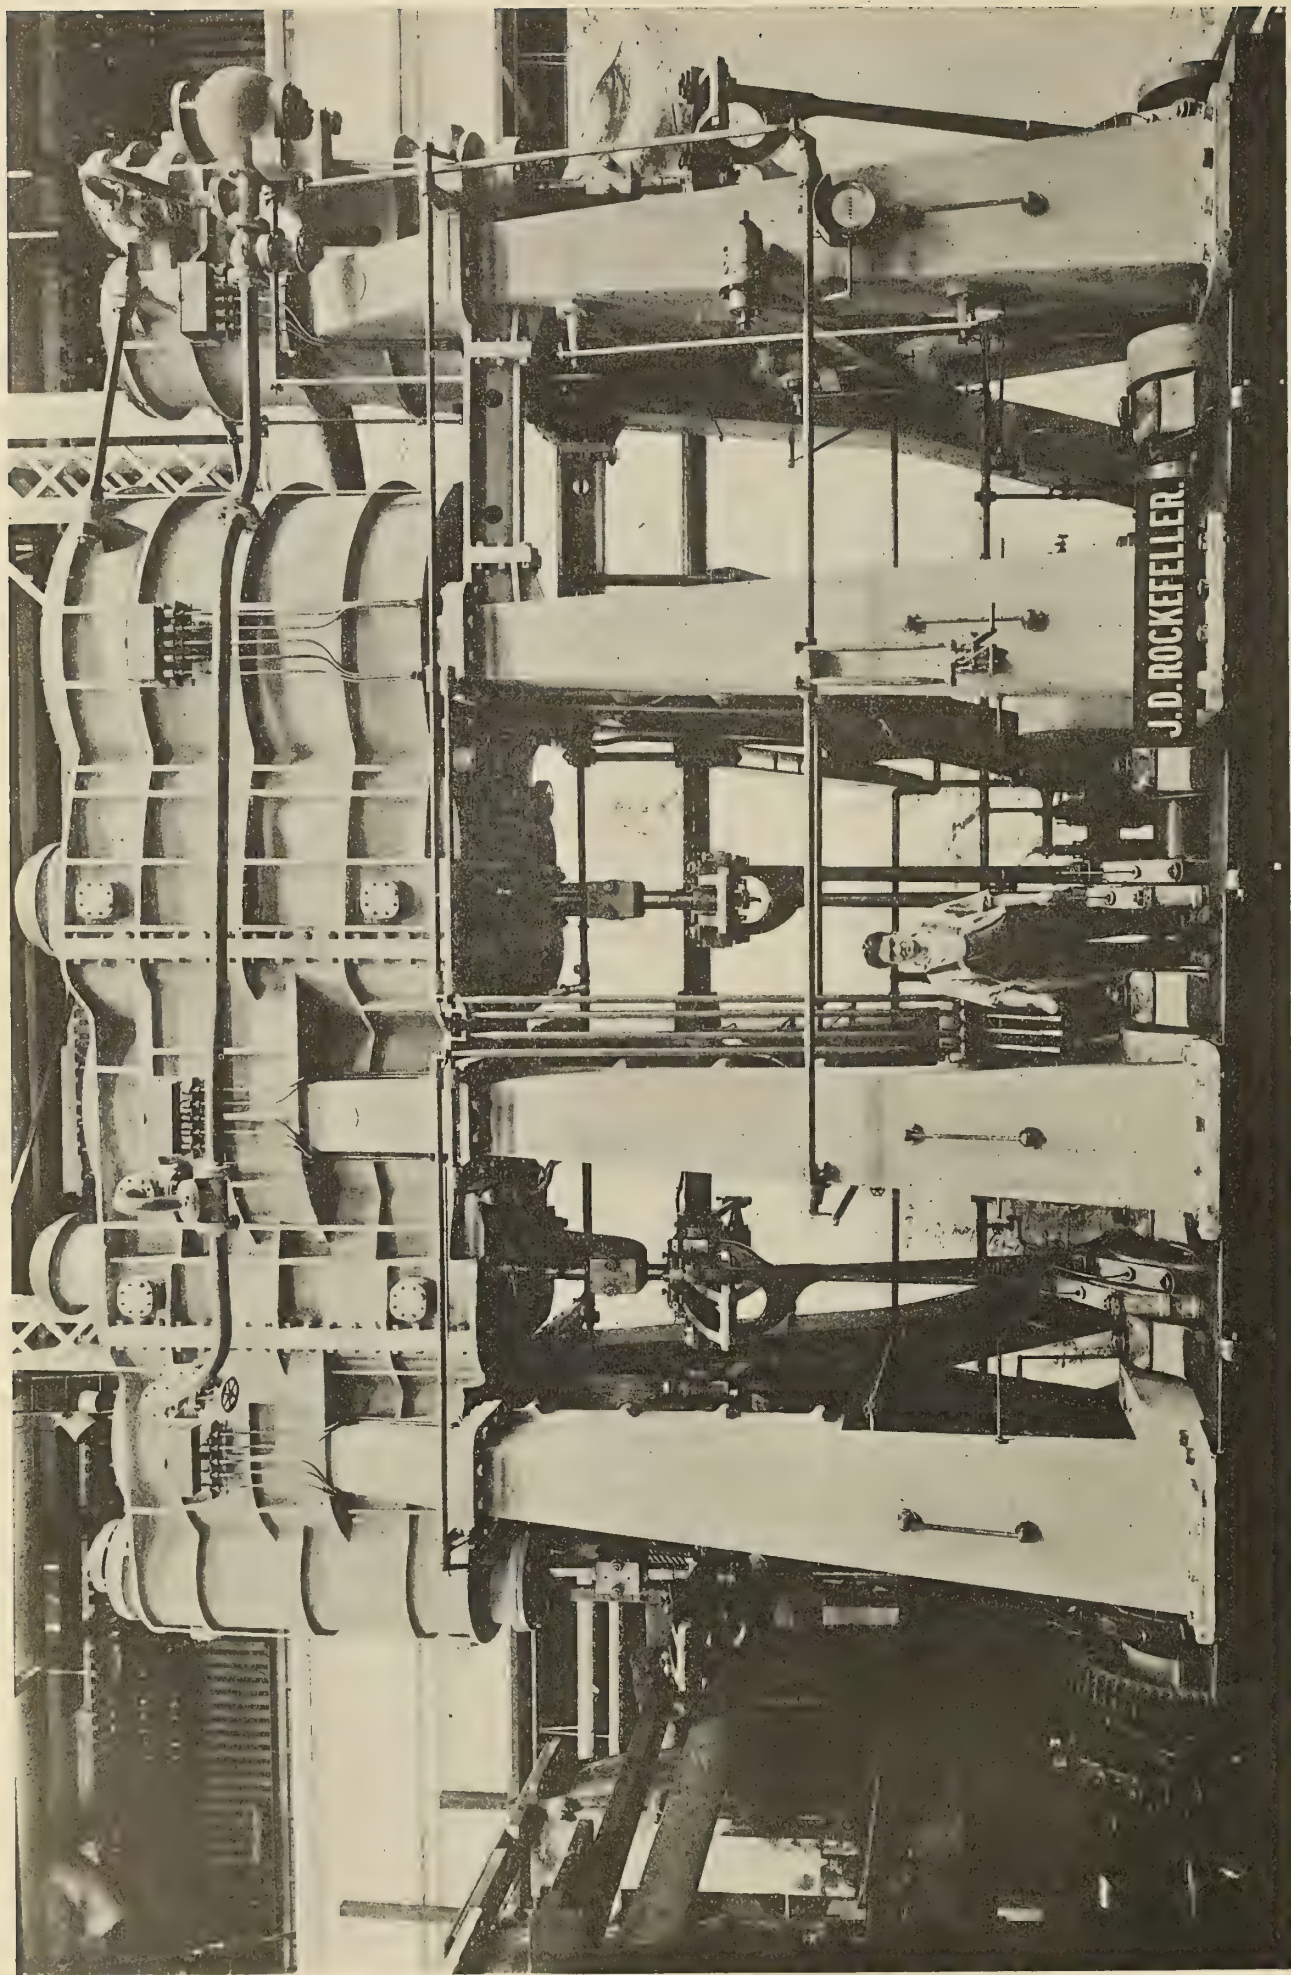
Engine Completely Assembled in the Shop and Ready for Disassembling and Installing in the Ship
